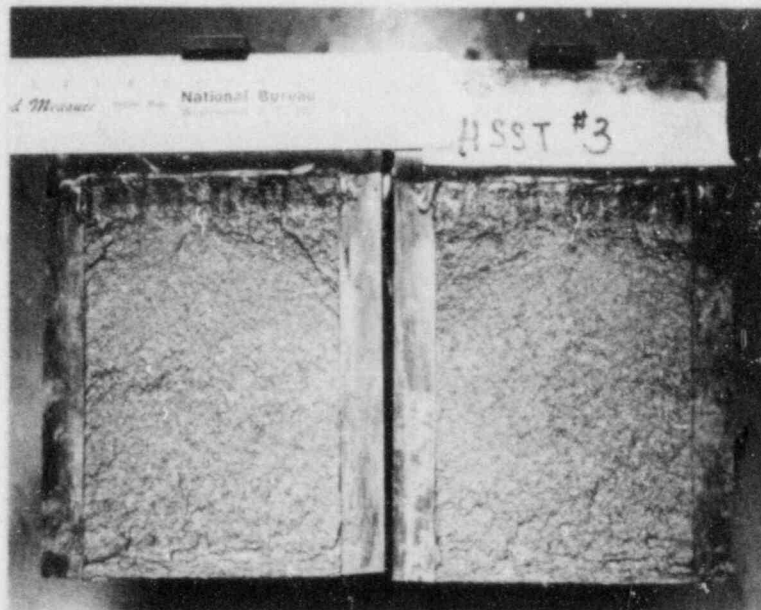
Fracture surface of bend test specimen No. 3.
